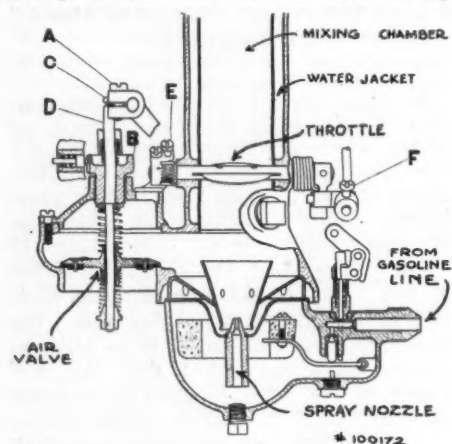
Sectional drawing showing points of adjustment of 1913 Cadillac carbureter
